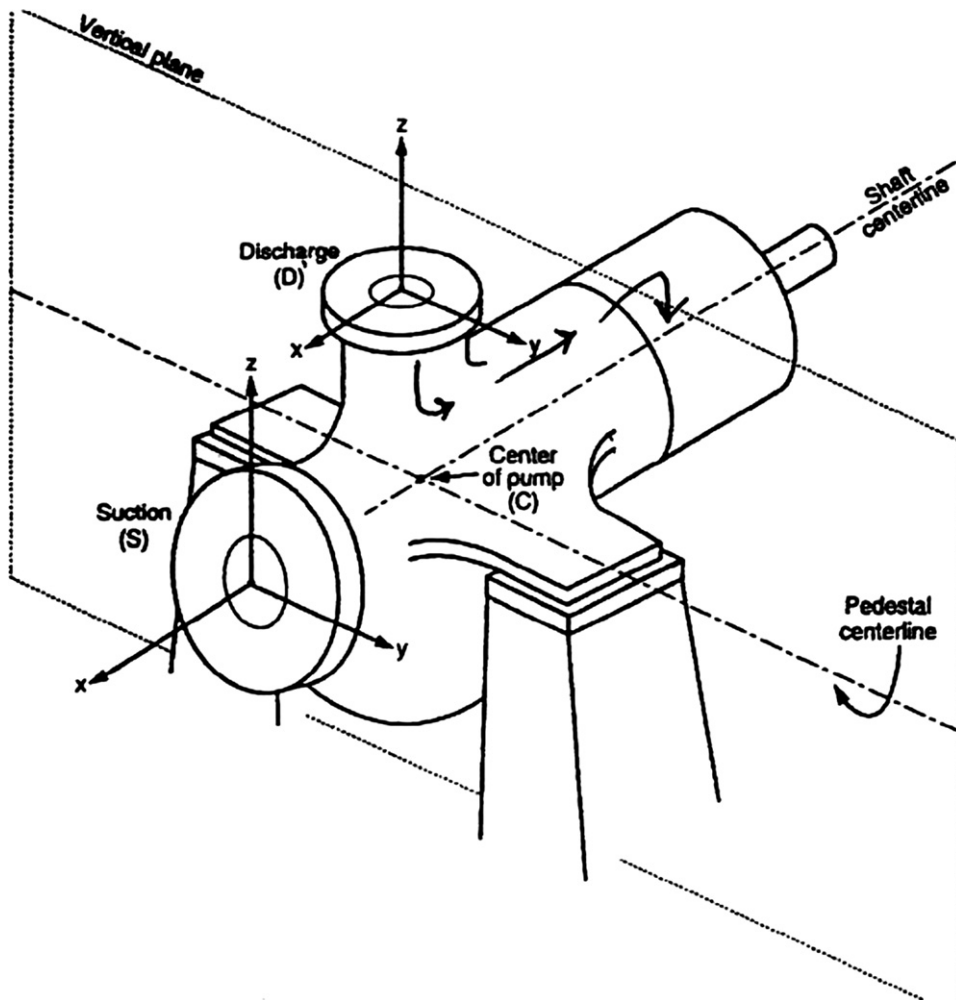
• Force path from excessive discharge flange loadings to the bearing bracket (Courtesy of API)
